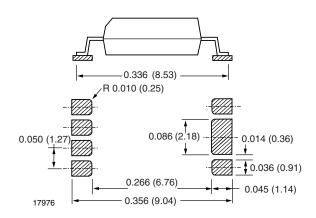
8 Pin PCMCIA, Heat Sink
